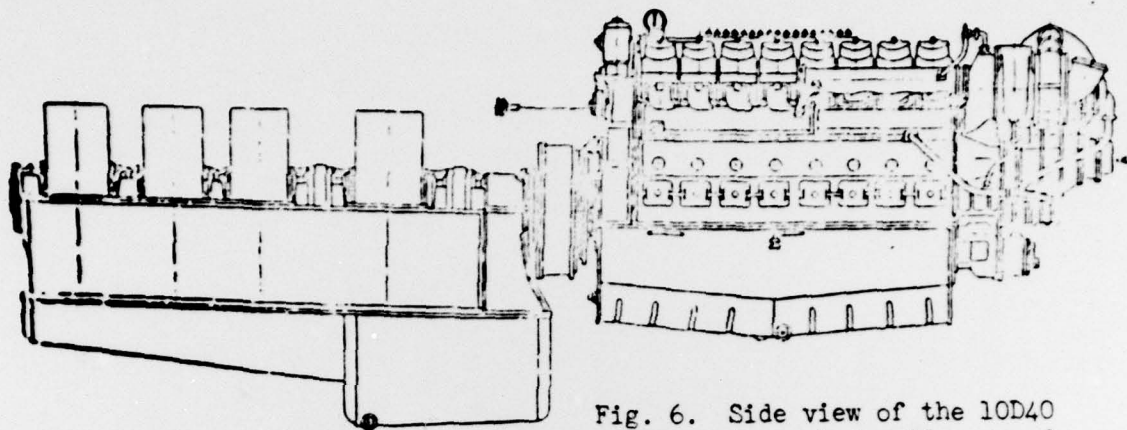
Side view of the 10D40 engine using a hydraulic geared transmission
